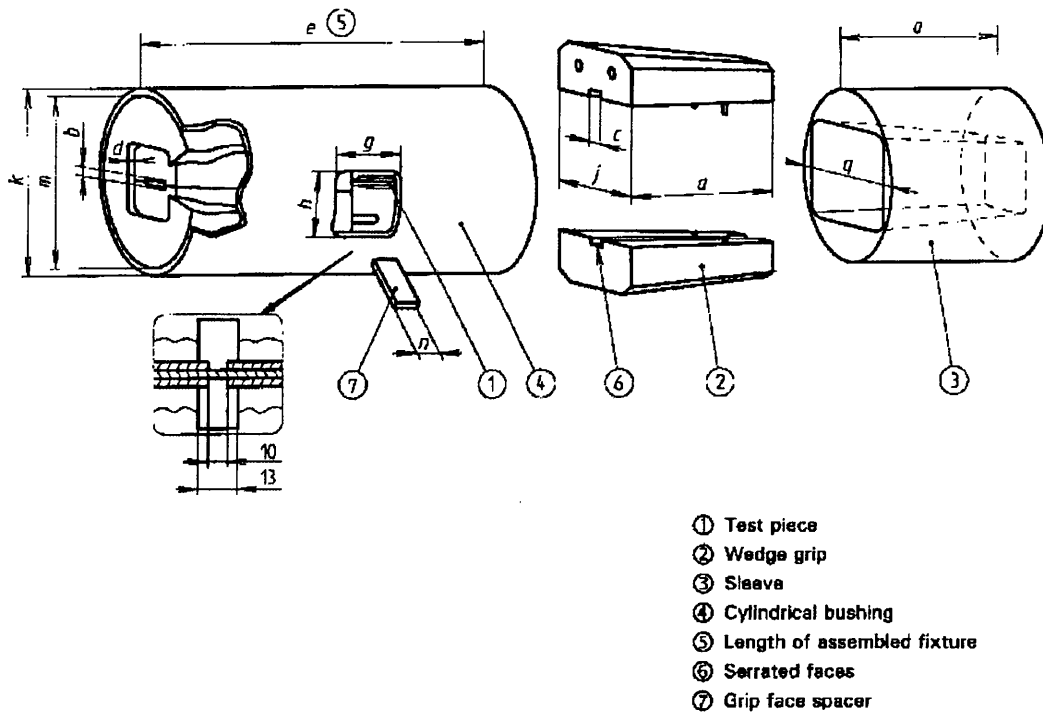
Basic Schematic of Method 'A' Test Fixture [13]
